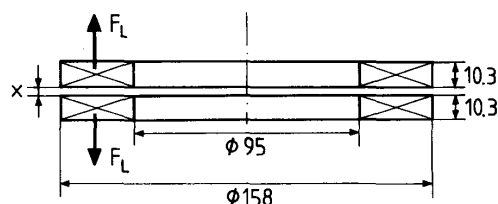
Cross-section of the coil system. Sizes in millimetres.
